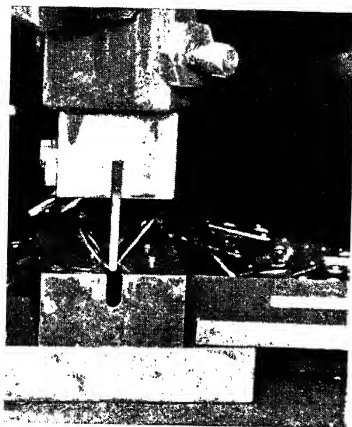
BENDING OPERATION ON HAND PRESS (3).
